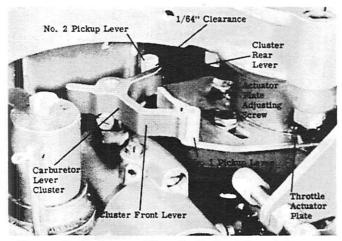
Carburetor Throttle Pickup Plate Adjustment
